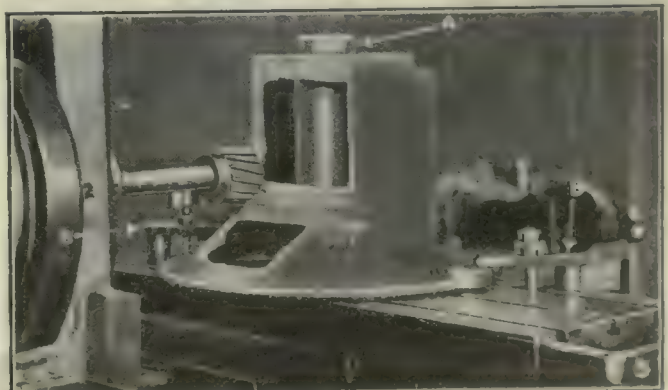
RE-MACHINING A BUILT-UP TRANSMISSION CASE
